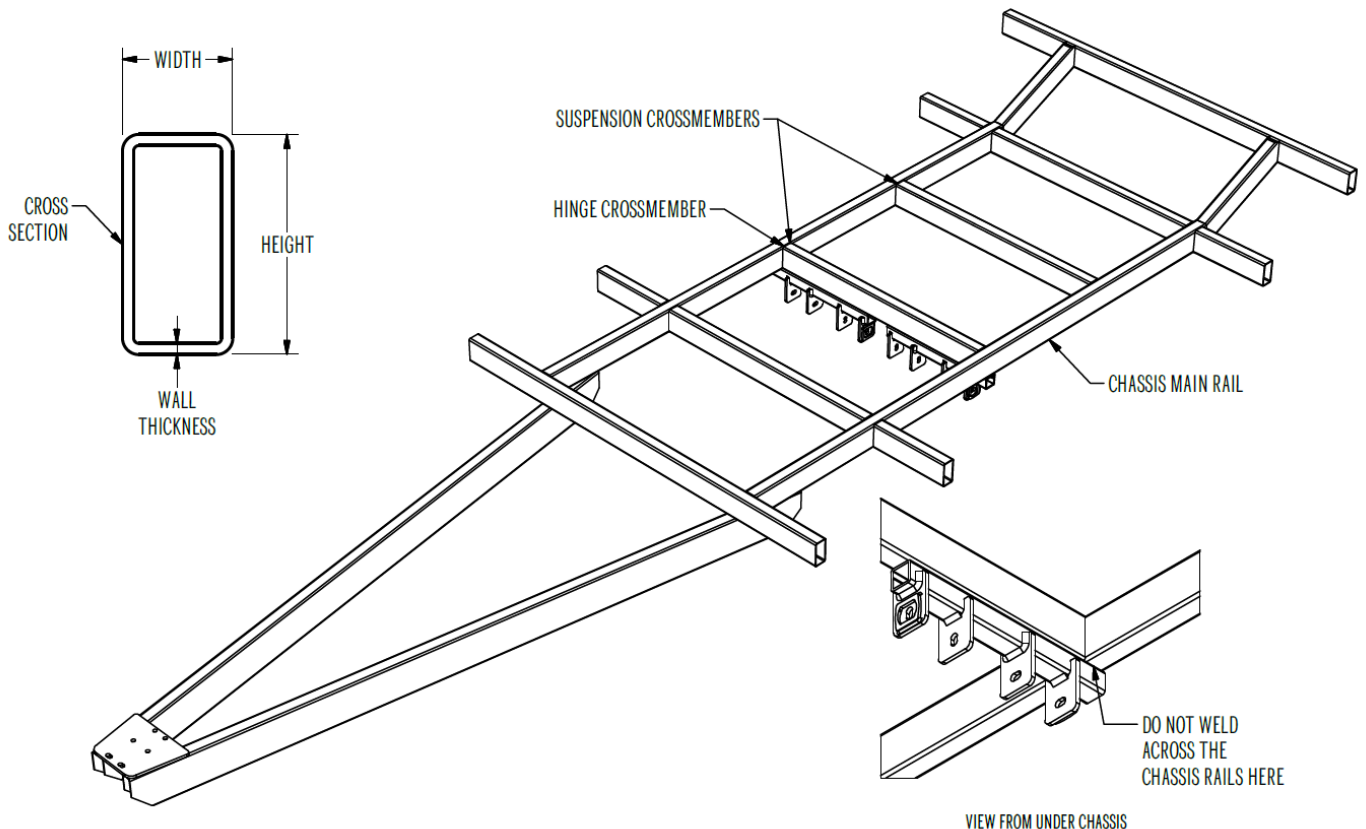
CHASSIS MEMBERS AND SECTION
